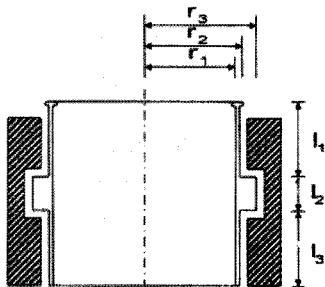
Dimensions of a rotating ring of the one-stage rectangular (convex) type
